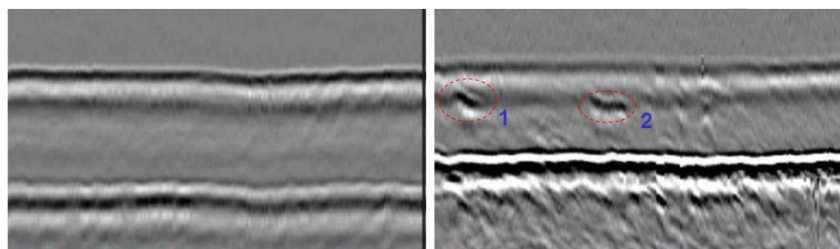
An example of TOFD D-scan cartography: healthy weld (left), and a weld containing defects (right).
